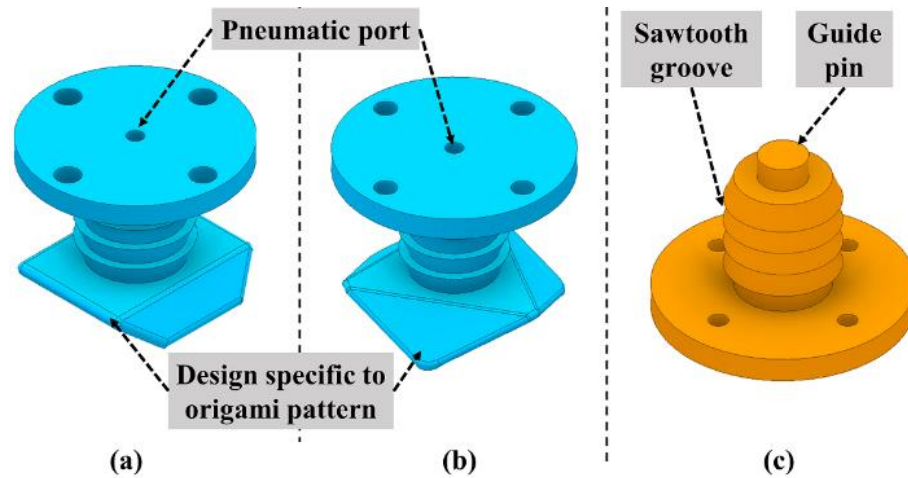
End cap designs. (a) Top end cap for accordion pattern OSPA. (b) Top end cap for Yoshimura pattern OSPA. (c) Bottom end cap design that is not pattern specific
